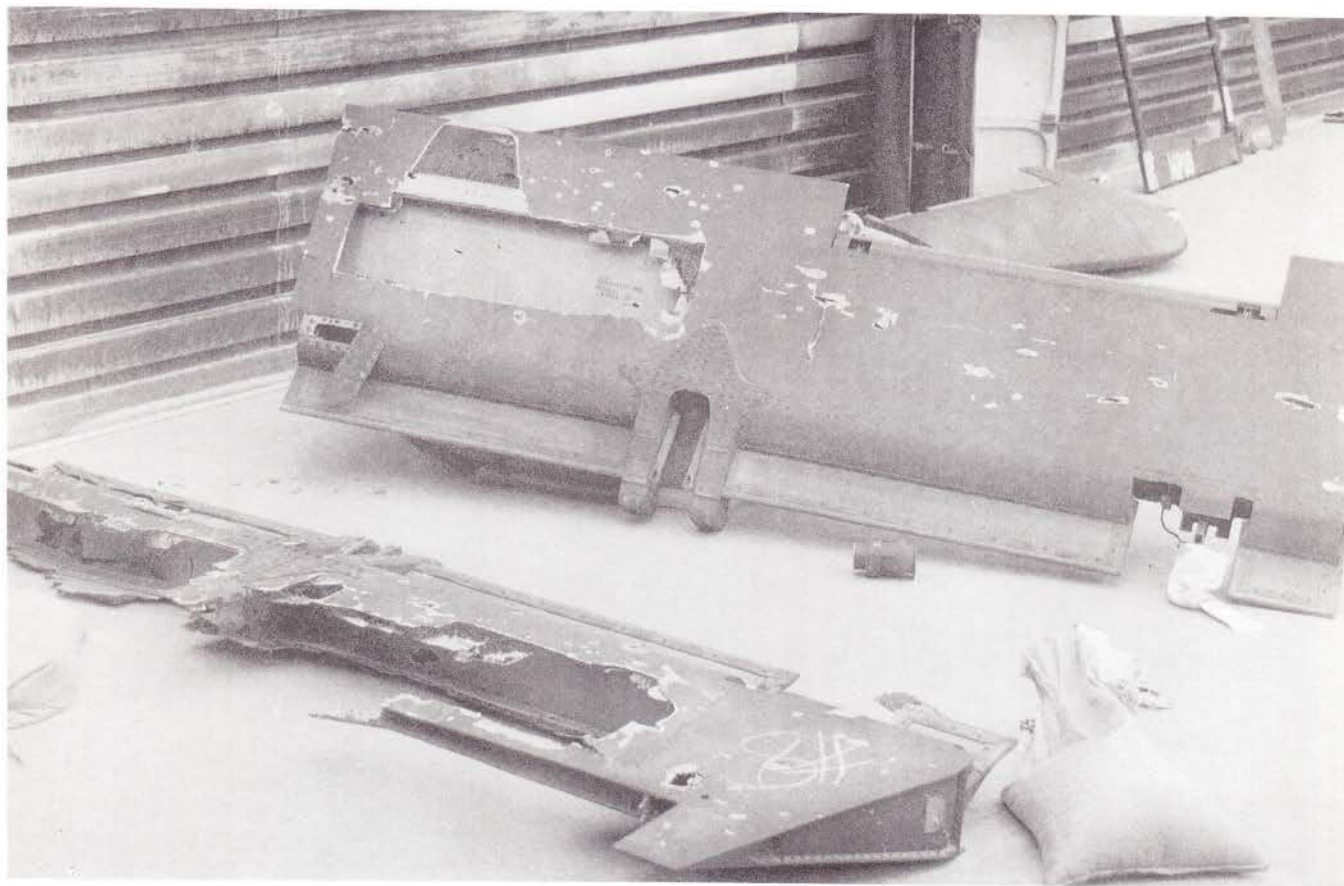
Damaged elevators, A-10 S/N 80-186.
